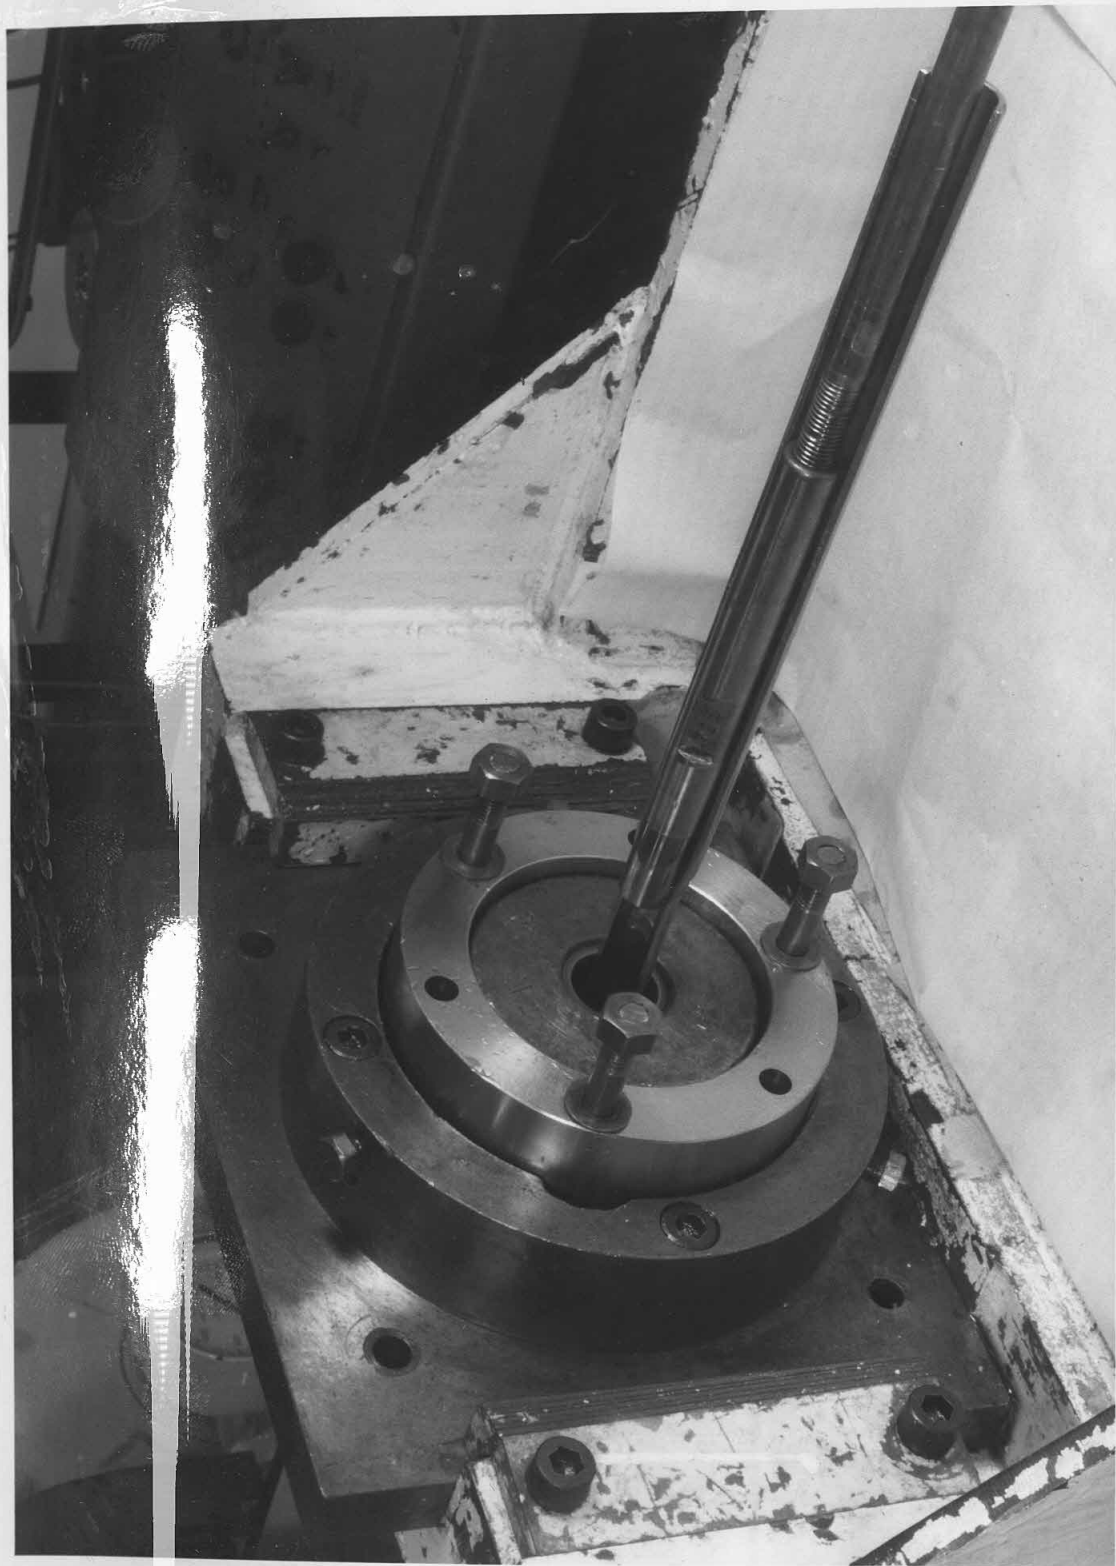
Arrangement of the plug in conventional tube-drawing practice
